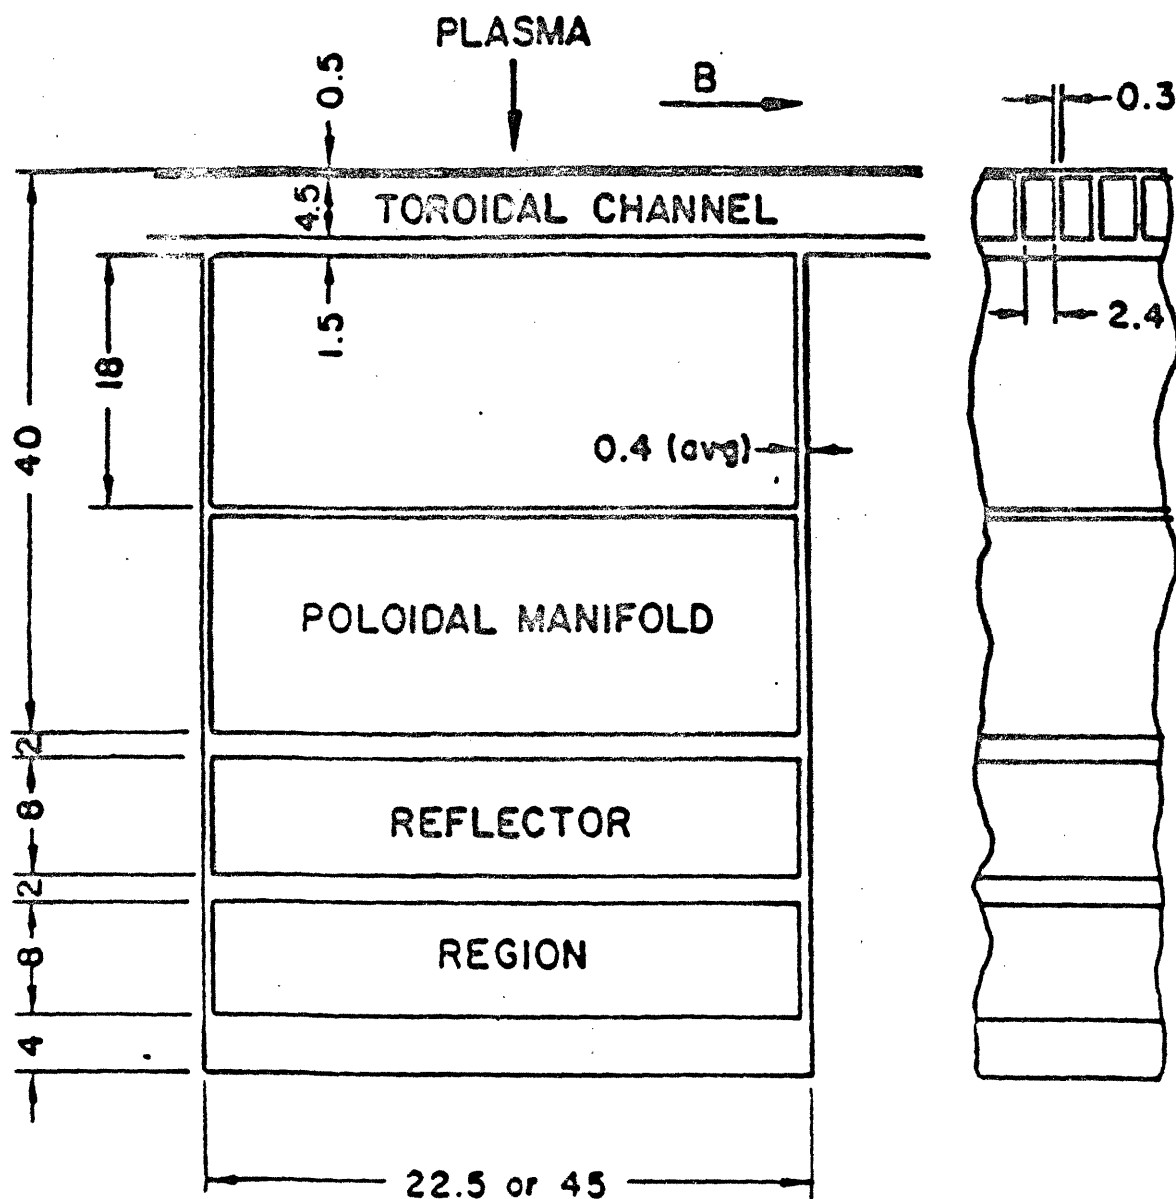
Cross-sectional View and Dimensions of Blanket = 1. From Reference [2.2].
